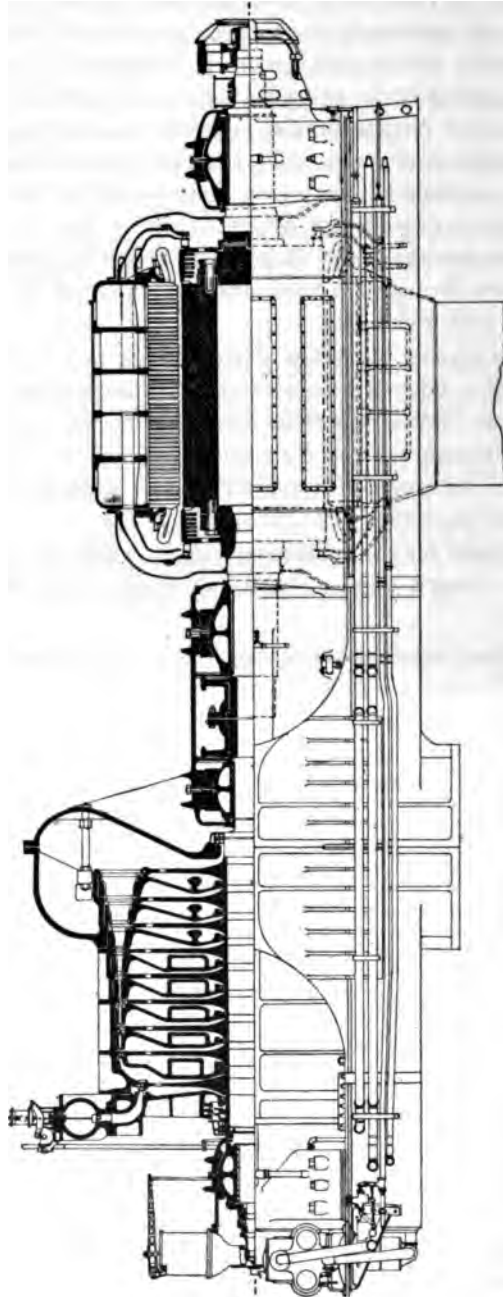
SECTIONAL VIEW OF ONE OF THE 25,000 K.V.A. TURBO-GENERATOR UNITS
